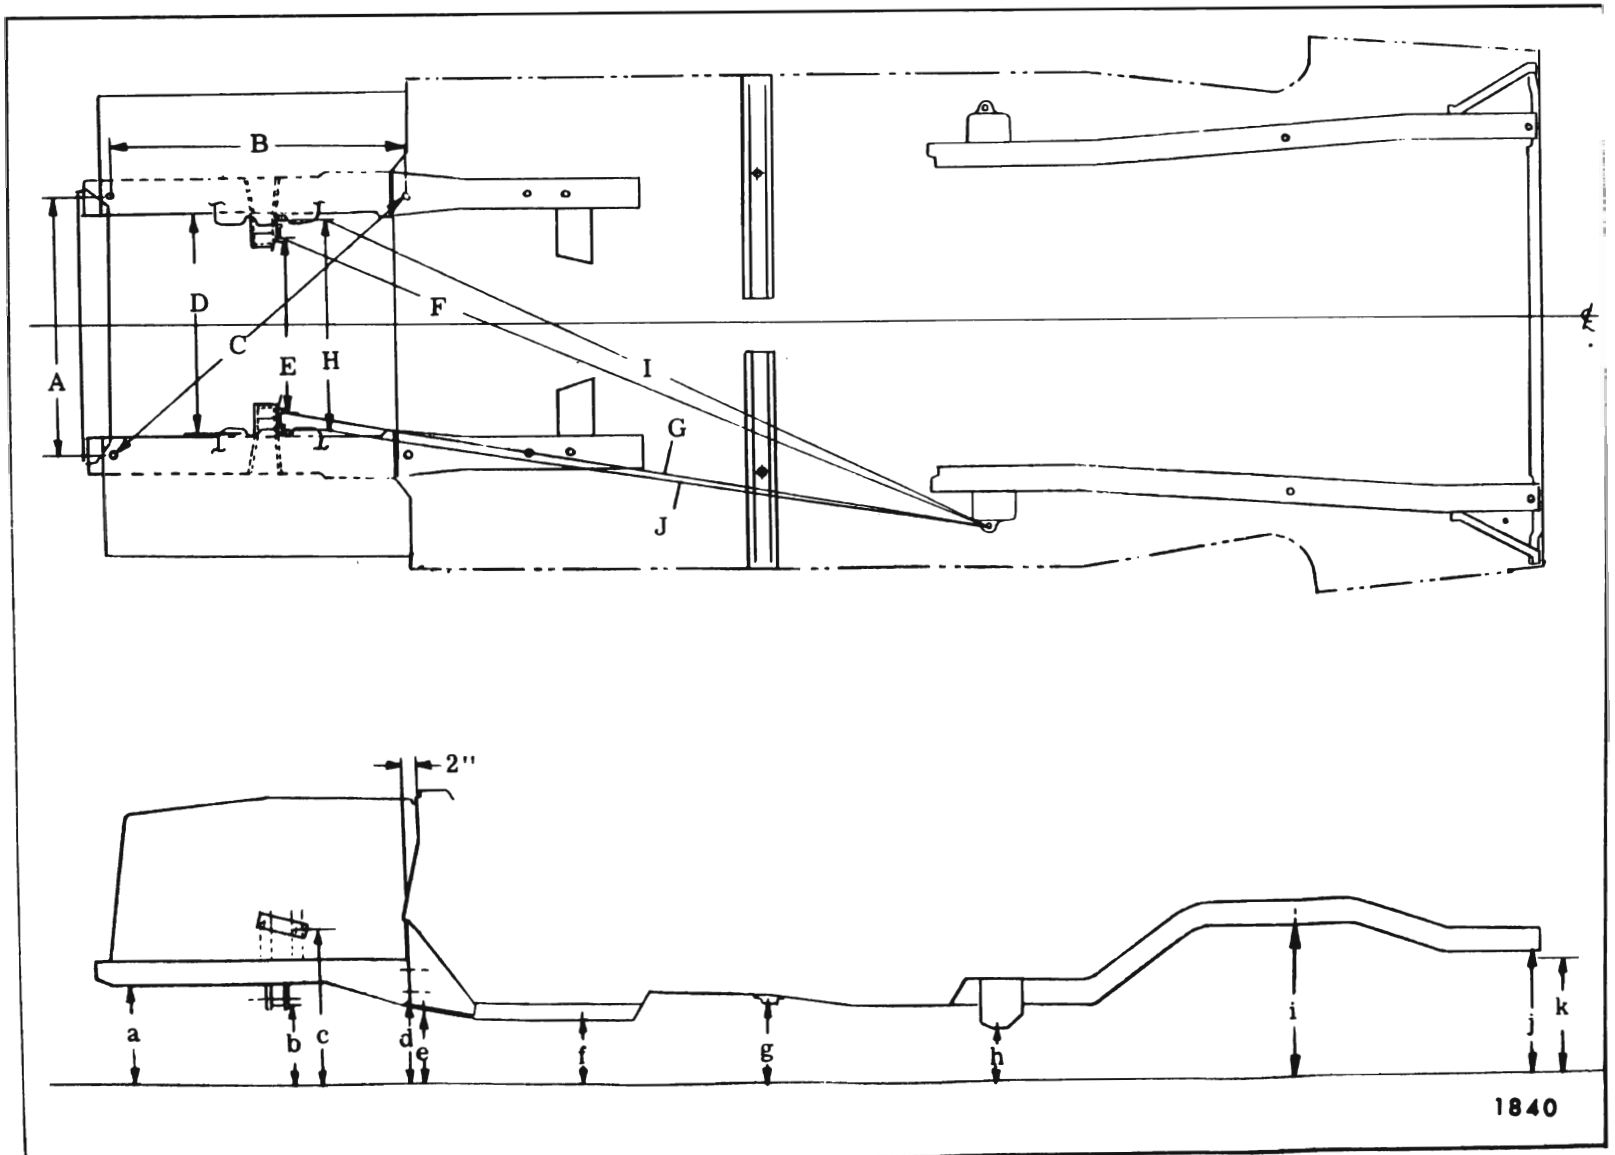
Horizontal and Vertical Dimensions (Front Skirt Assembly)
